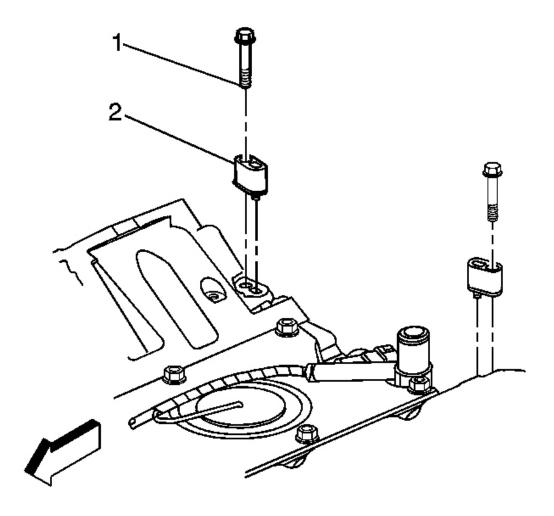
View Of Coolant Air Pipe Covers & Bolts Courtesy of GENERAL MOTORS CORP.
